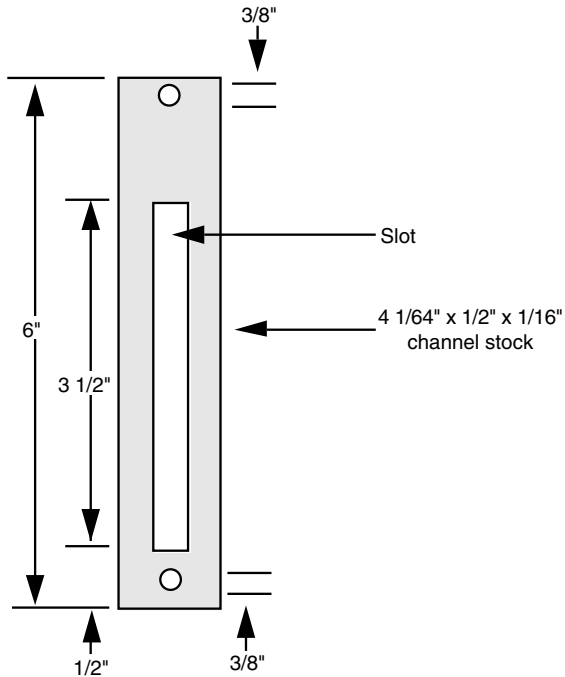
Cutting and drilling guide for the cam sliders (six required).
